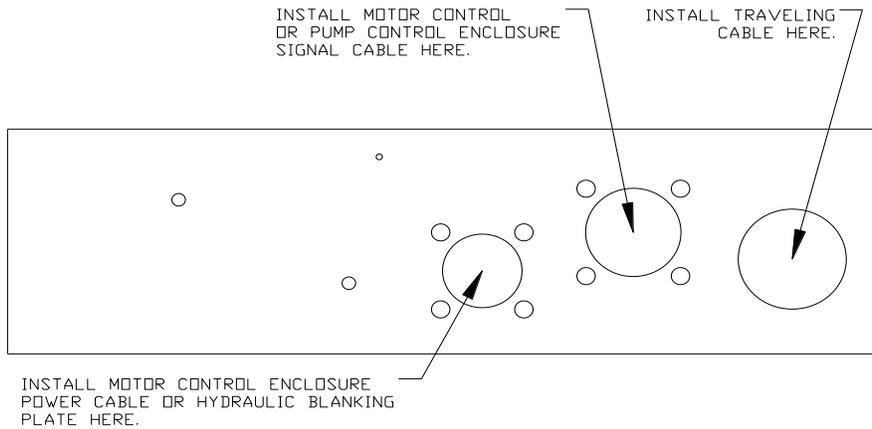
CPU CONTROL ENCLOSURE, BOTTOM VIEW
